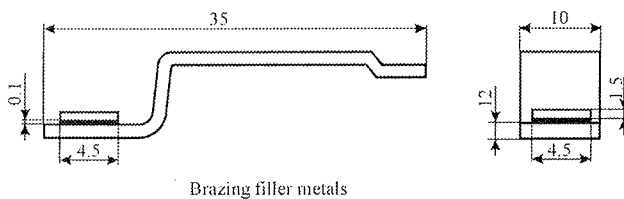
Schematic representation of copper and silver elements including brazing filler metal, and the joint.
